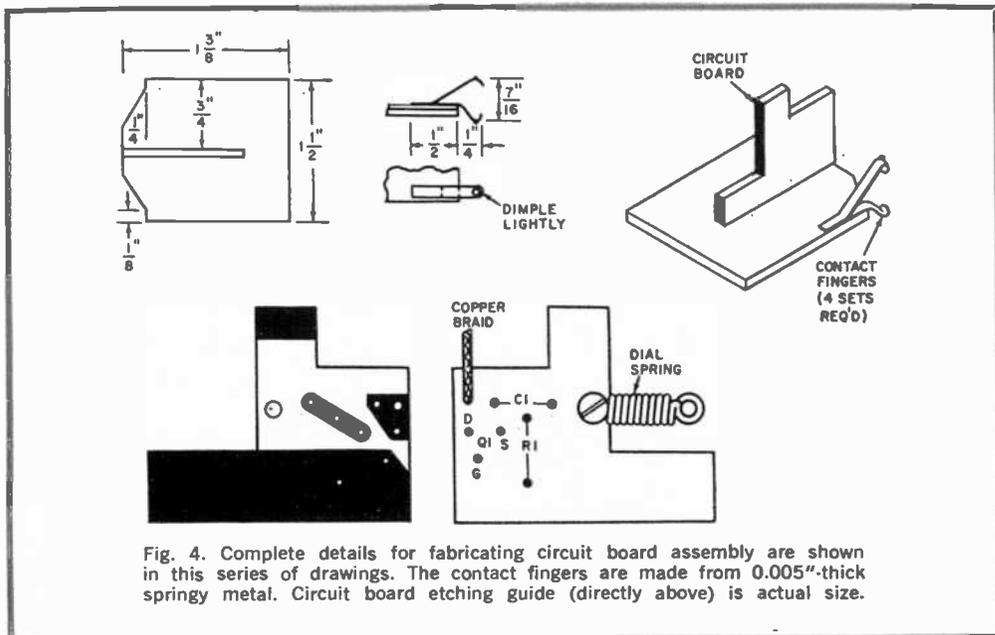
Complete details for fabricating circuit board assembly are shown in this series of drawings. The contact fingers are made from 0.005"-thick springy metal. Circuit board etching guide (directly above) is actual size.
